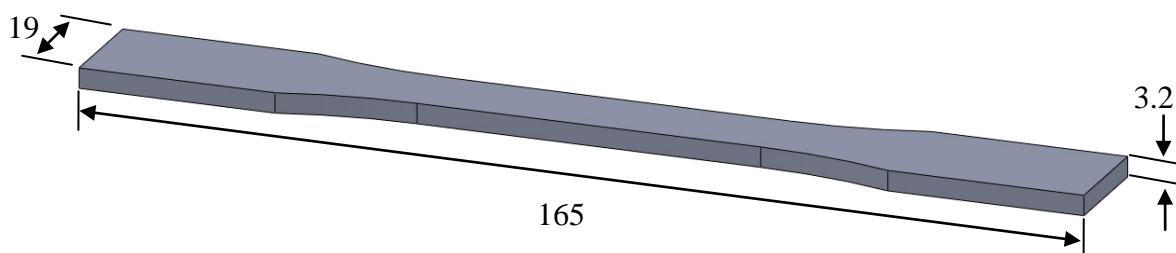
ASTM D638 Type I specimen (all units in millimeters)
